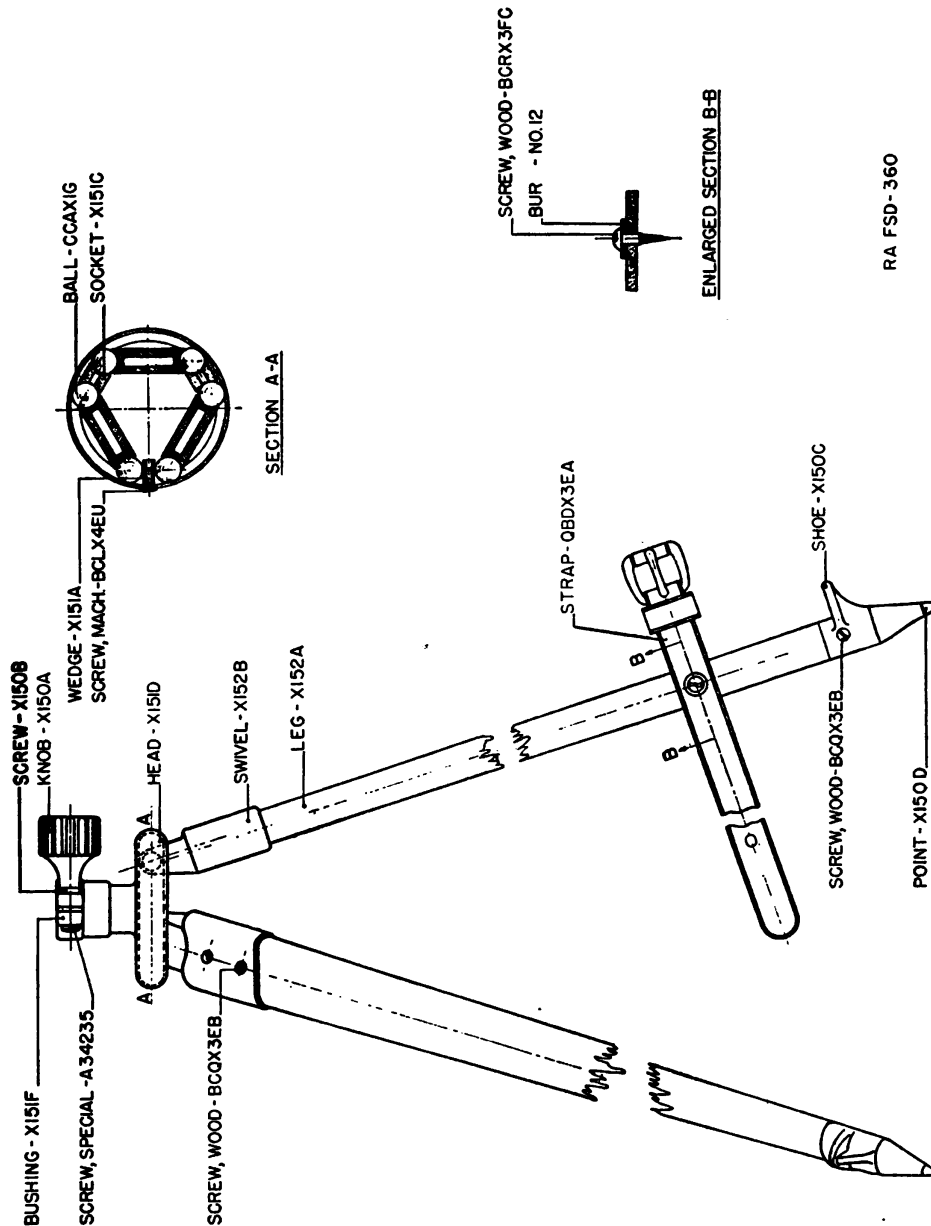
Tripod, type R—assembly and sectioned views.
